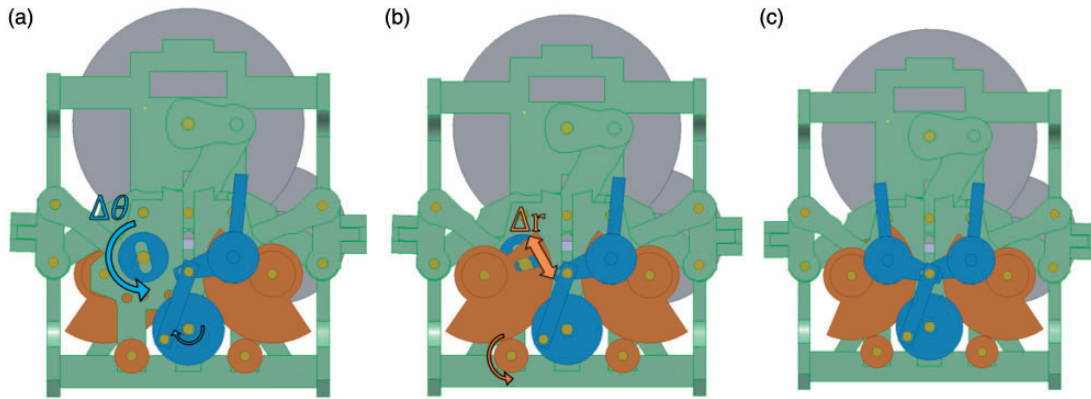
Three-dimensional CAD drawings of the control mechanism: (a) θ - Motion, (b) r - Motion and (c) Front view.
